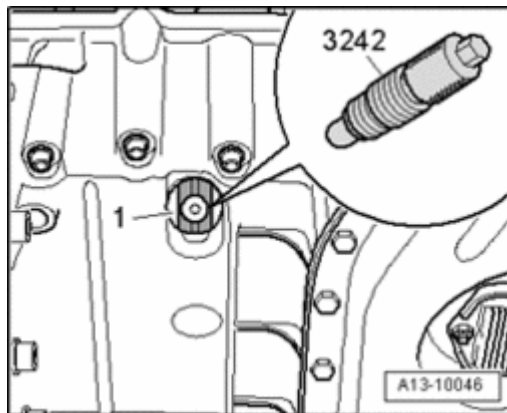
Installing/Removing Crankshaft Holder 3242 In Bore
